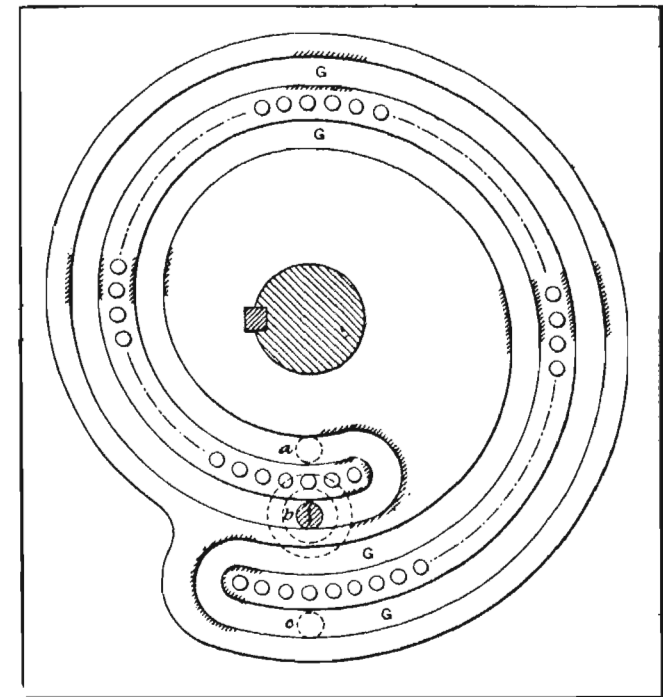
Pin Type of Mangle Gearing Arranged to Reverse Driven Shaft after One Complete Turn
